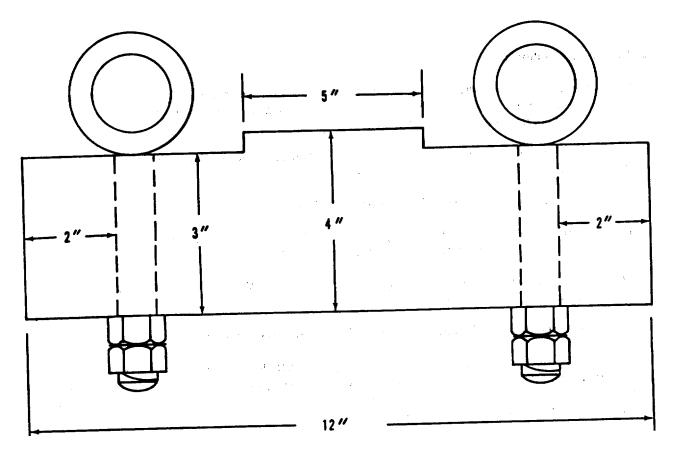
Dimensional Drawing for Fabricating Gun Muzzle Attachment
